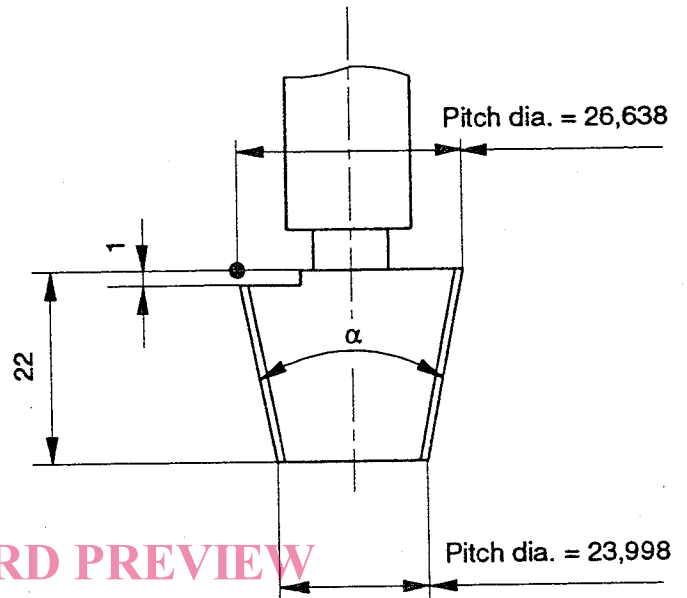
Threaded plug gauge for pitch diameters "I-2"
